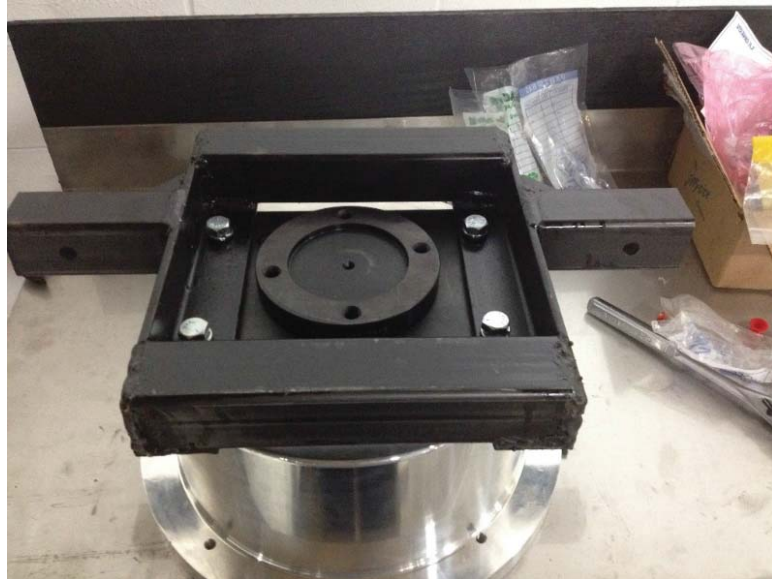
Bell Housing Mounted with Front Mount Frame
